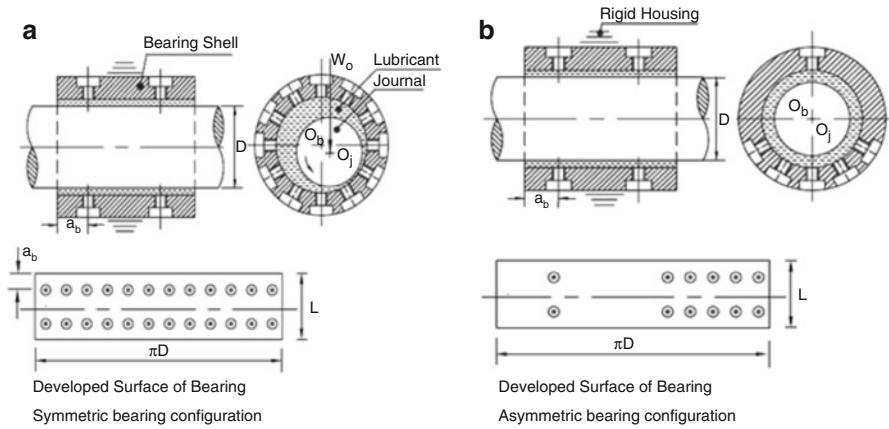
Non-recessed hole entry journal bearing (a) Symmetric bearing configuration (b) Asymmetric bearing configuration [5, 17, 33]
